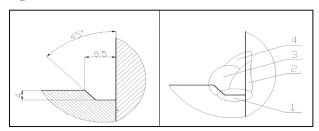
Design of the joint and its welding sequence for a fillet weld
